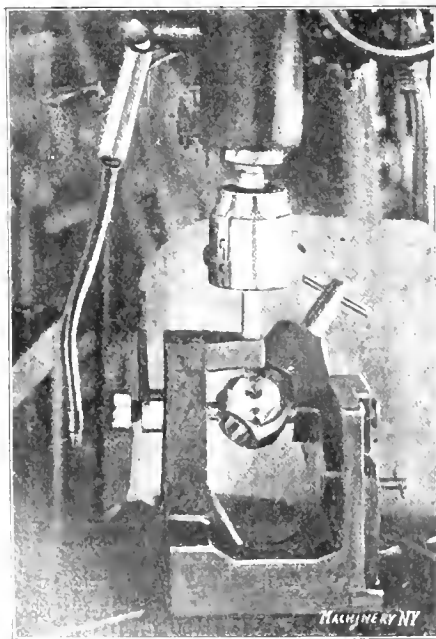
Fixture for Holding Hubs of Universal Planer Dies
